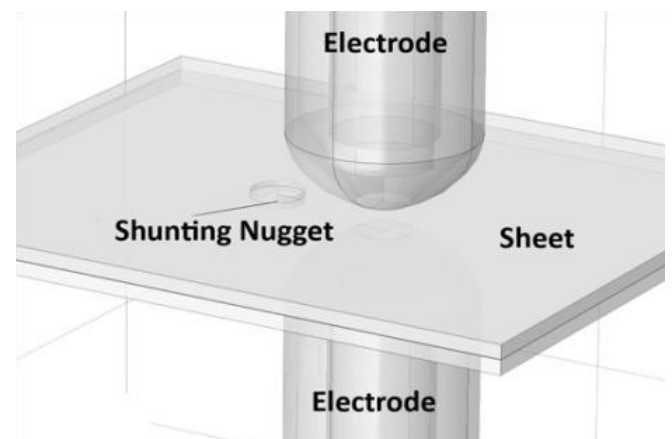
Finite element model configuration, including previous welding nugget, sheets, and electrodes
